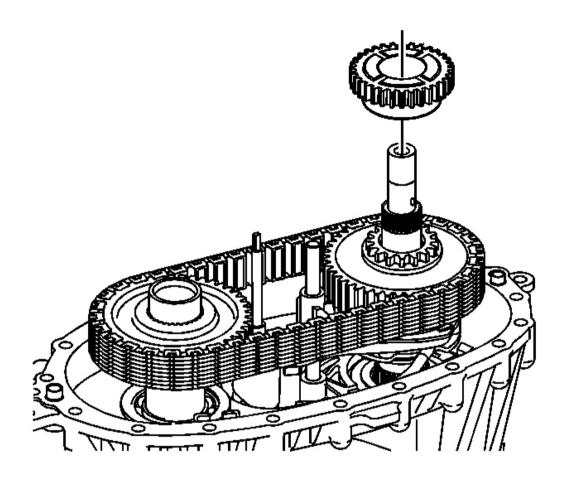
Front Sun Gear Courtesy of GENERAL MOTORS CORP.
